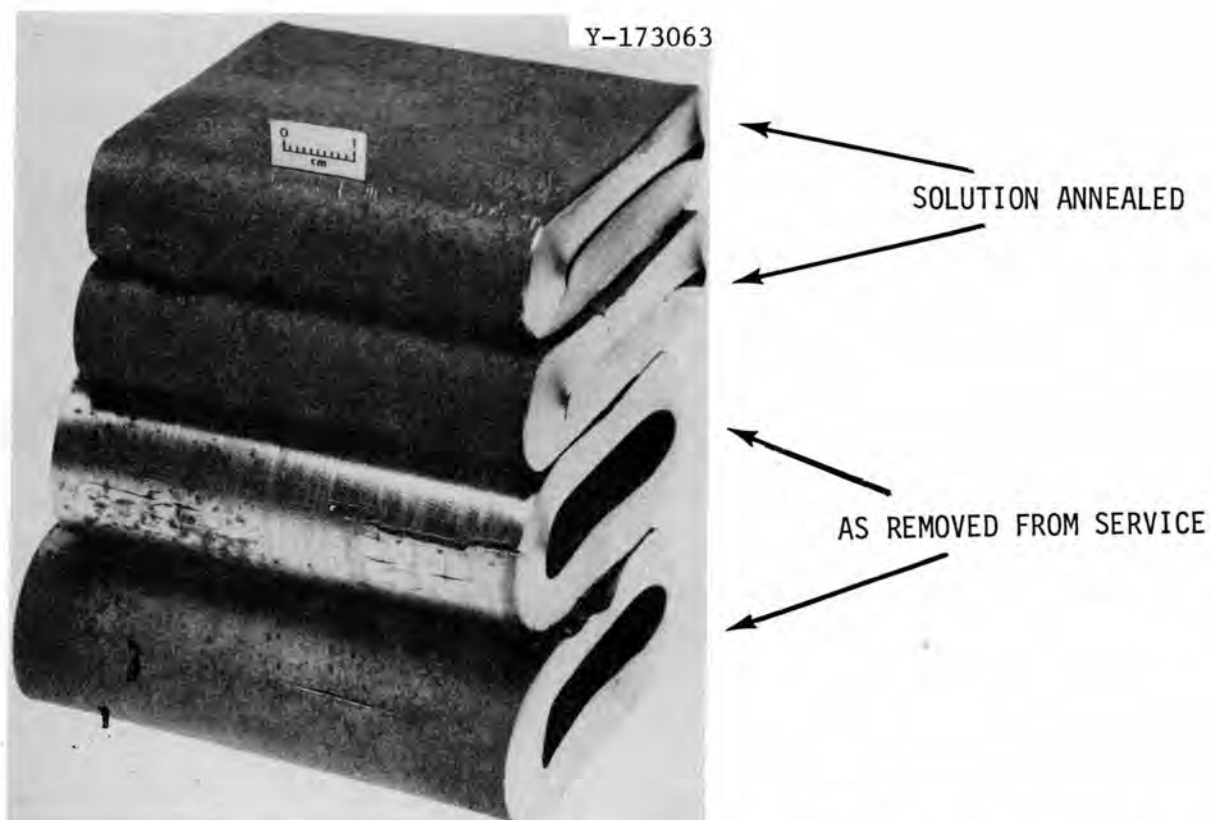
Response to flattening test of type 321 stainless steel removed from the TVA Kingston power plant. Two pieces each were tested as removed from service and after solution annealing for 0.5 h at 1065°C.
